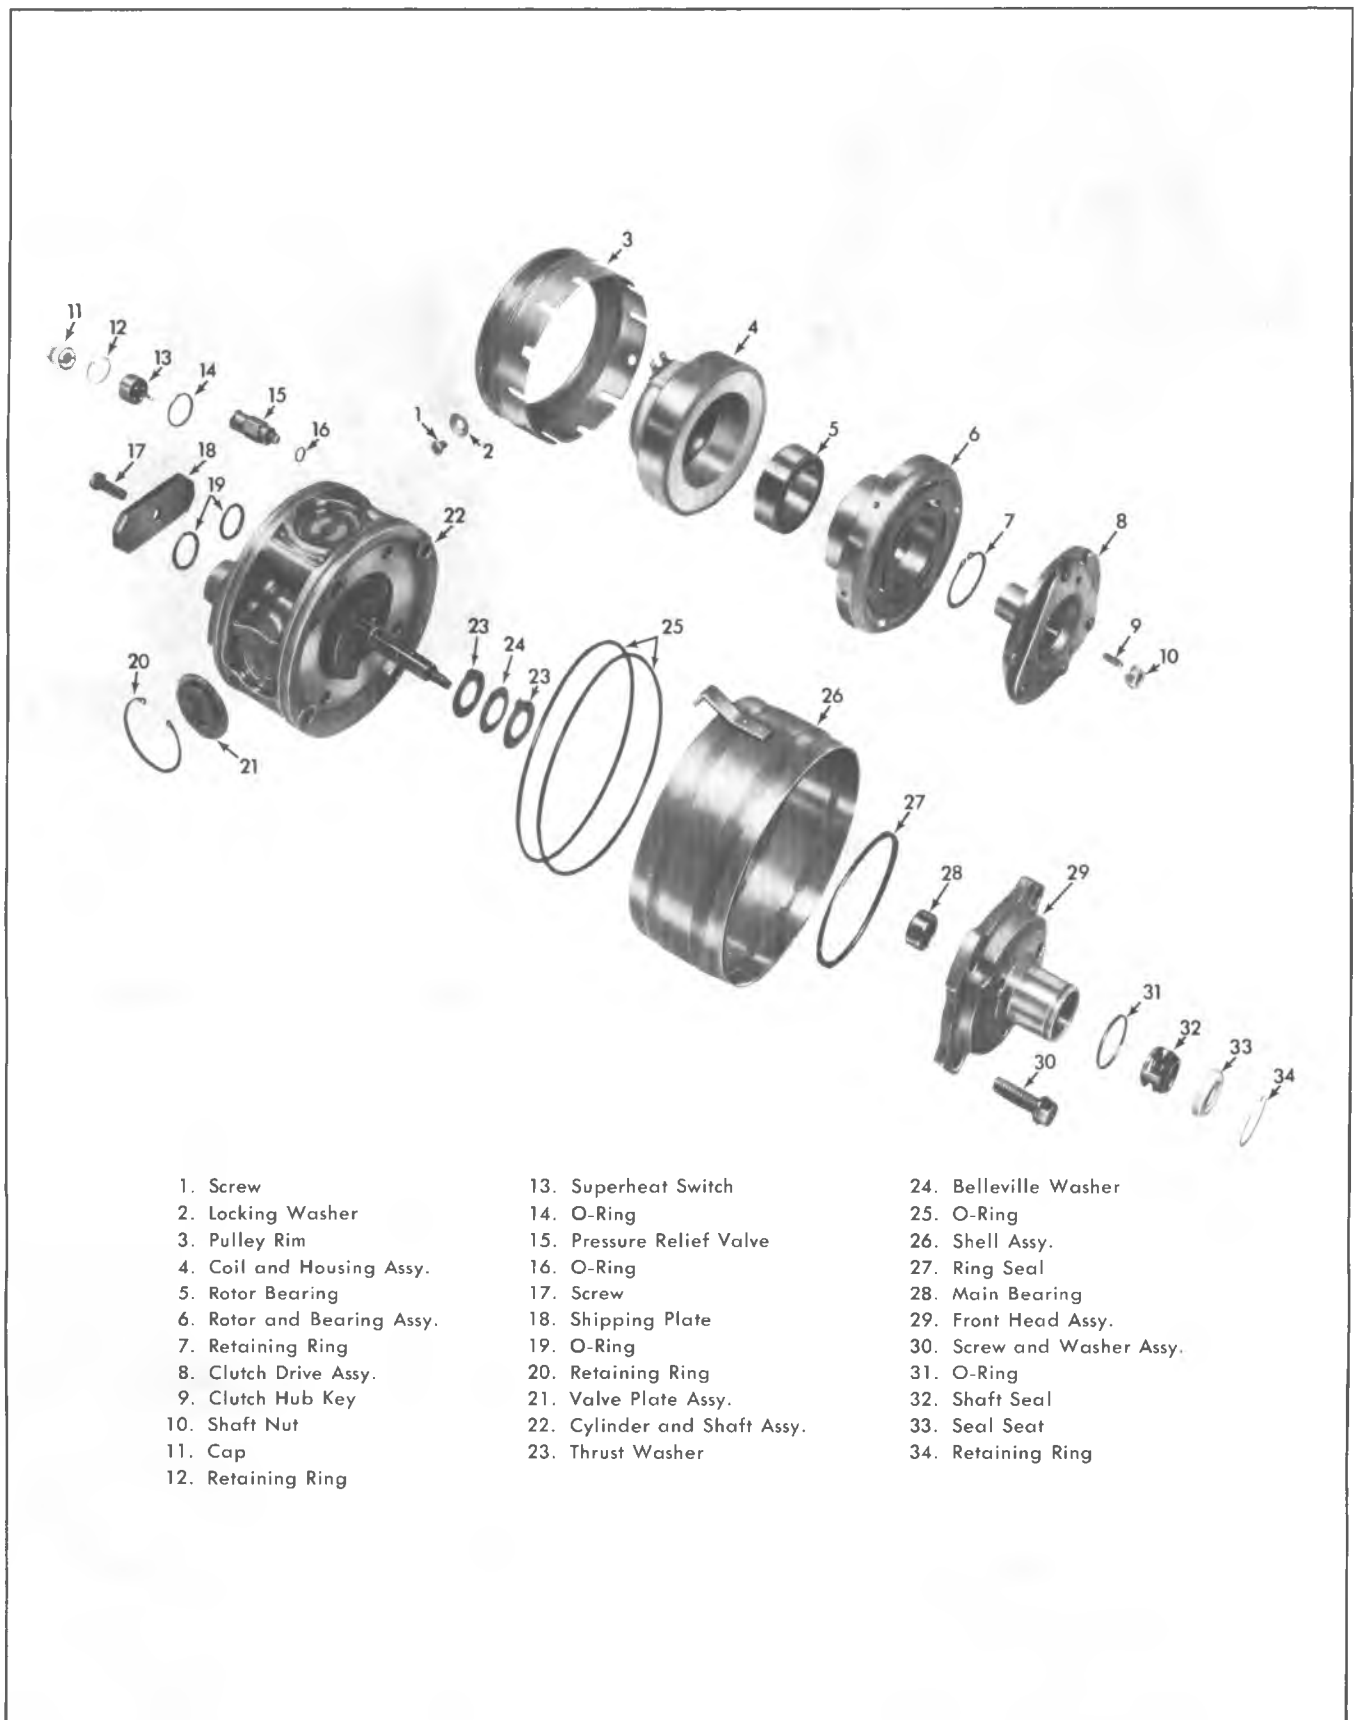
Radial Four Cylinder Compressor - Exploded View
